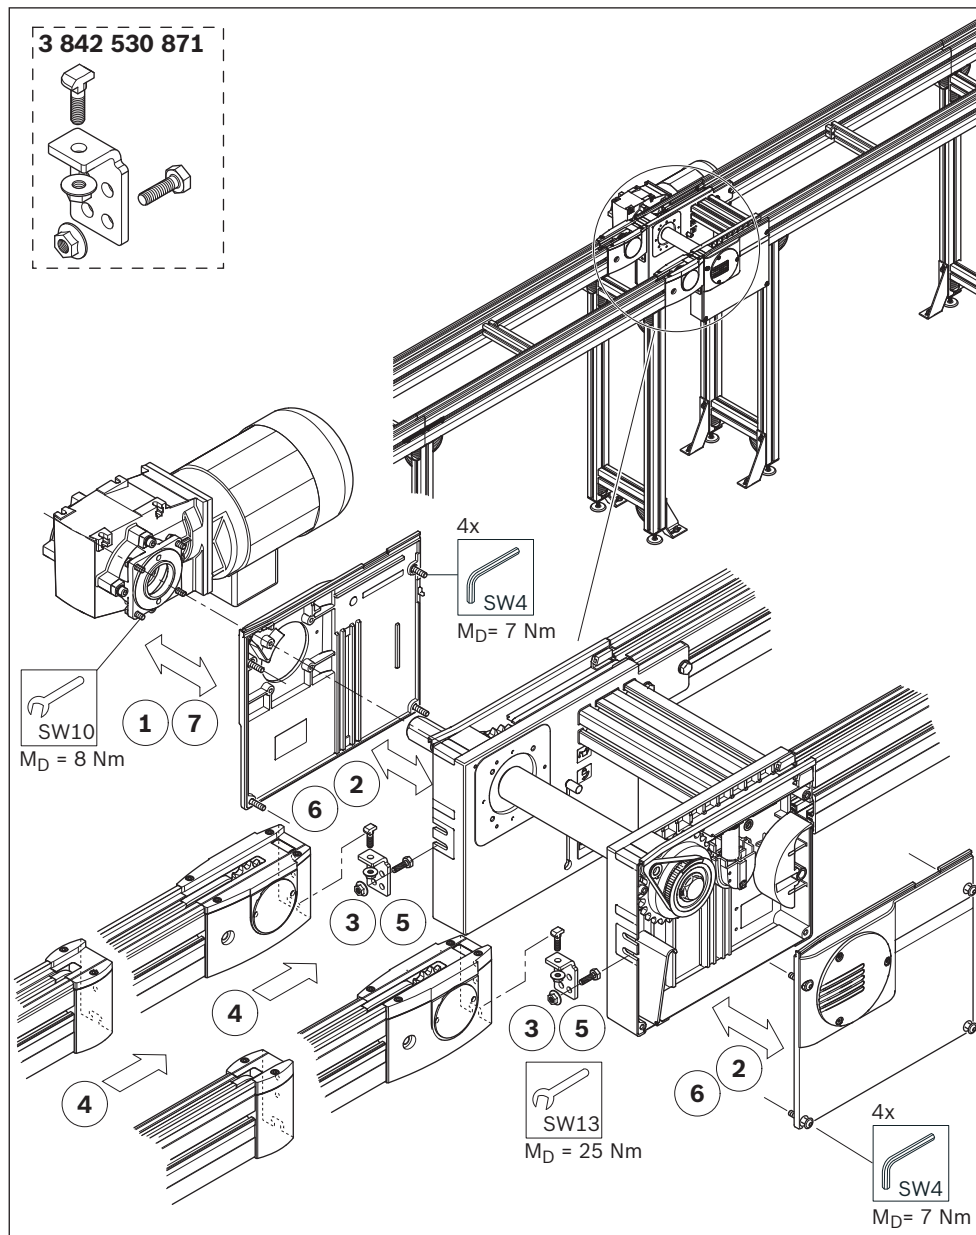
BS 2/C-100, ... : Assembling two belt sections, drive head to return unit
